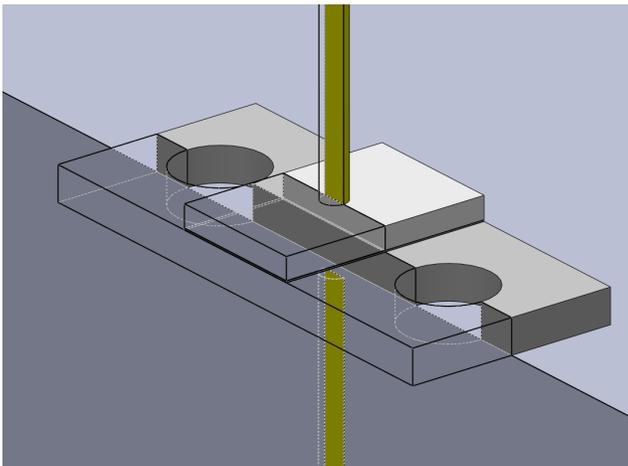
CROSS-SECTIONAL VIEW OF TEST SETUP
